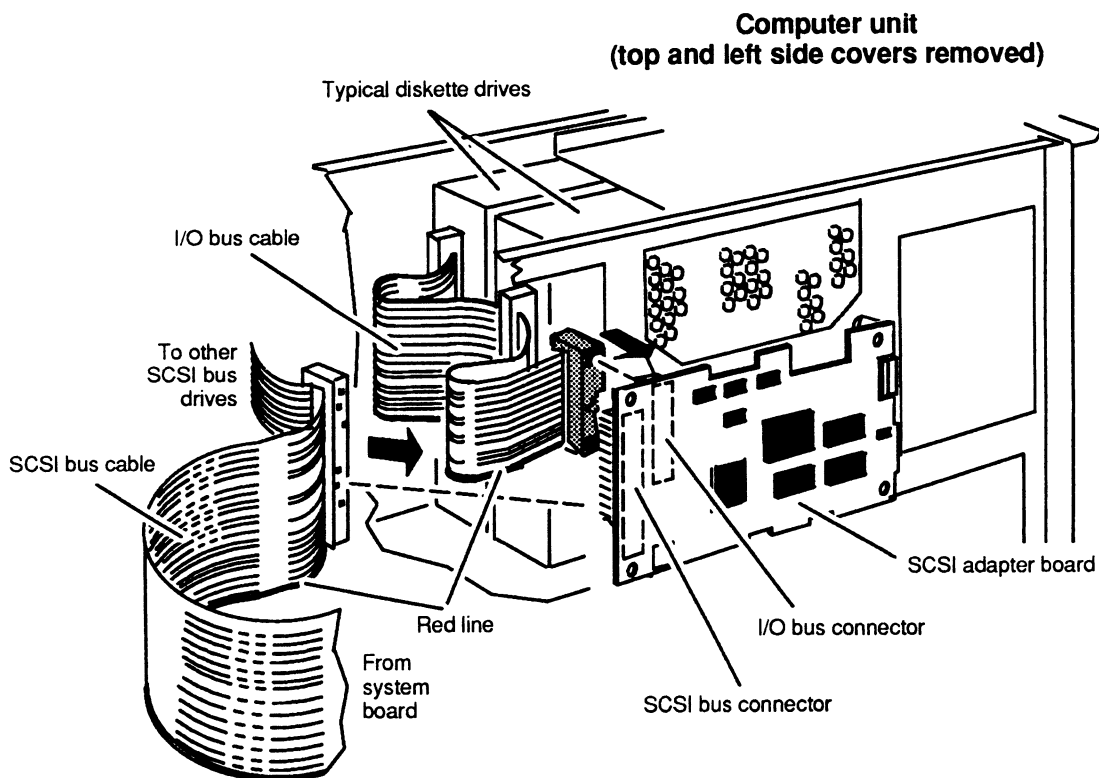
Plugging the SCSI Bus and I/O Bus Cables into the SCSI Adapter Board
